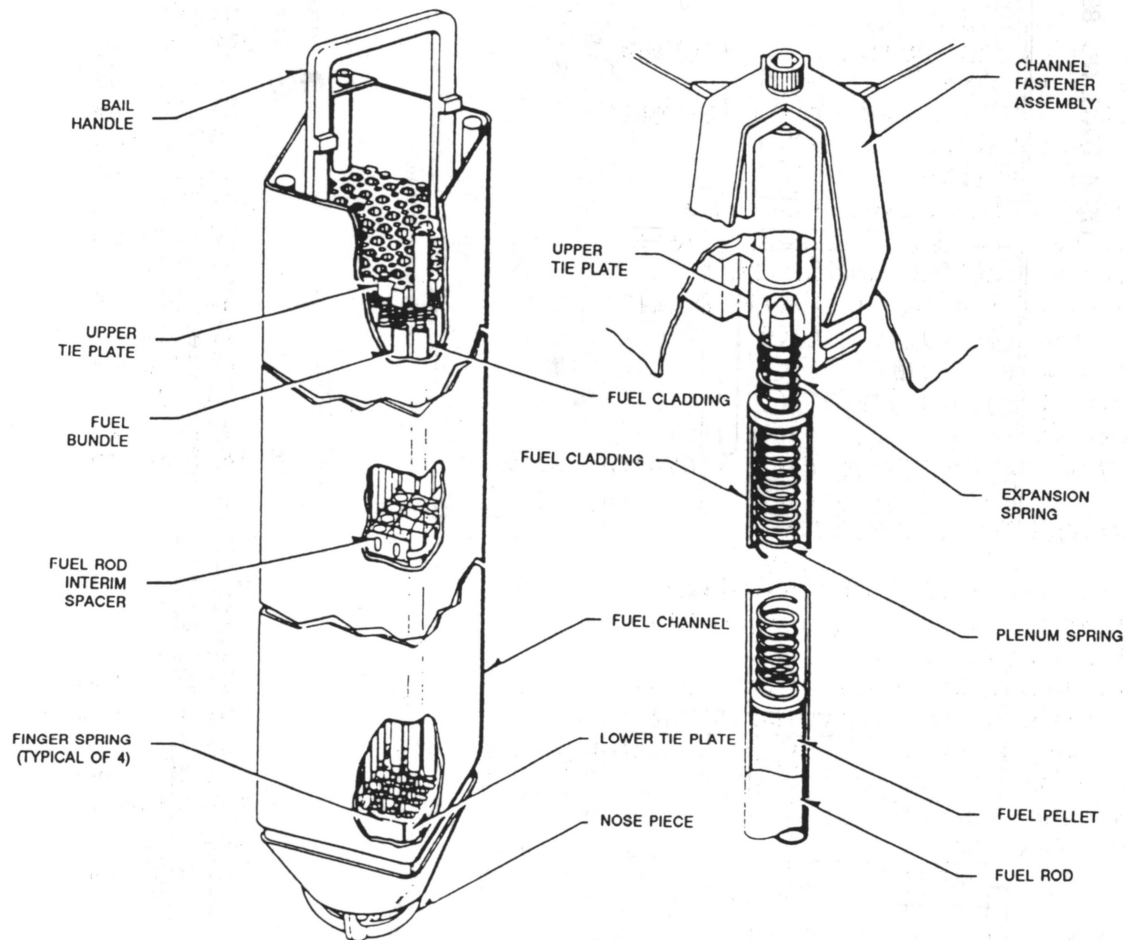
Cutaway view of a typical BWR/6 fuel assembly.
